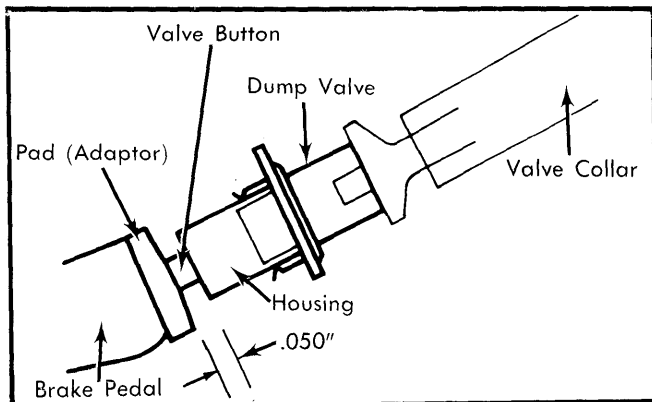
Vacuum Dump Valve. Valve Housing Must Clear Pad (Adapter) on Brake Pedal When Pedal Is Held in Full Rearward Position
